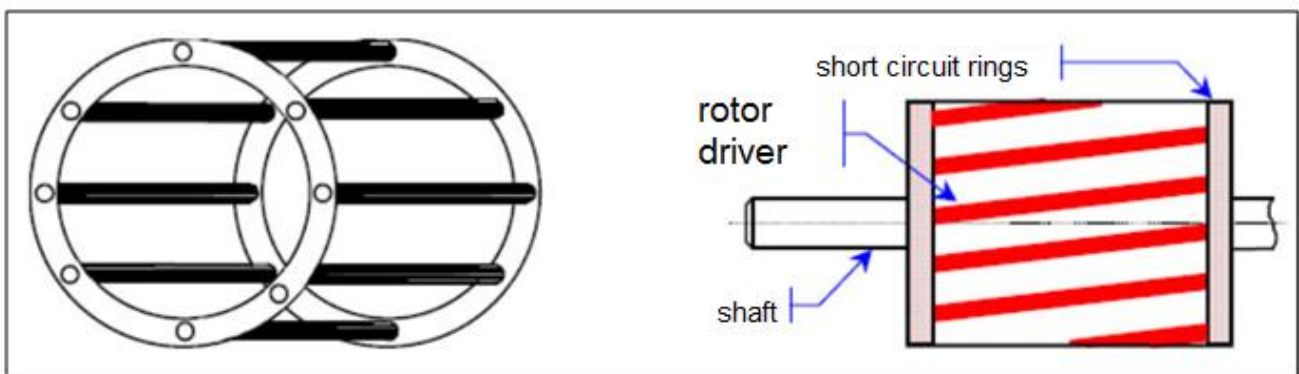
Schematic cutaway for the construction of the rotor [27].
